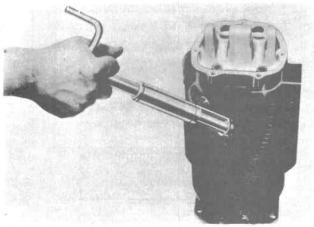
A. INSTALLING SPARK PLUG HOLE HELICAL INSERT.
